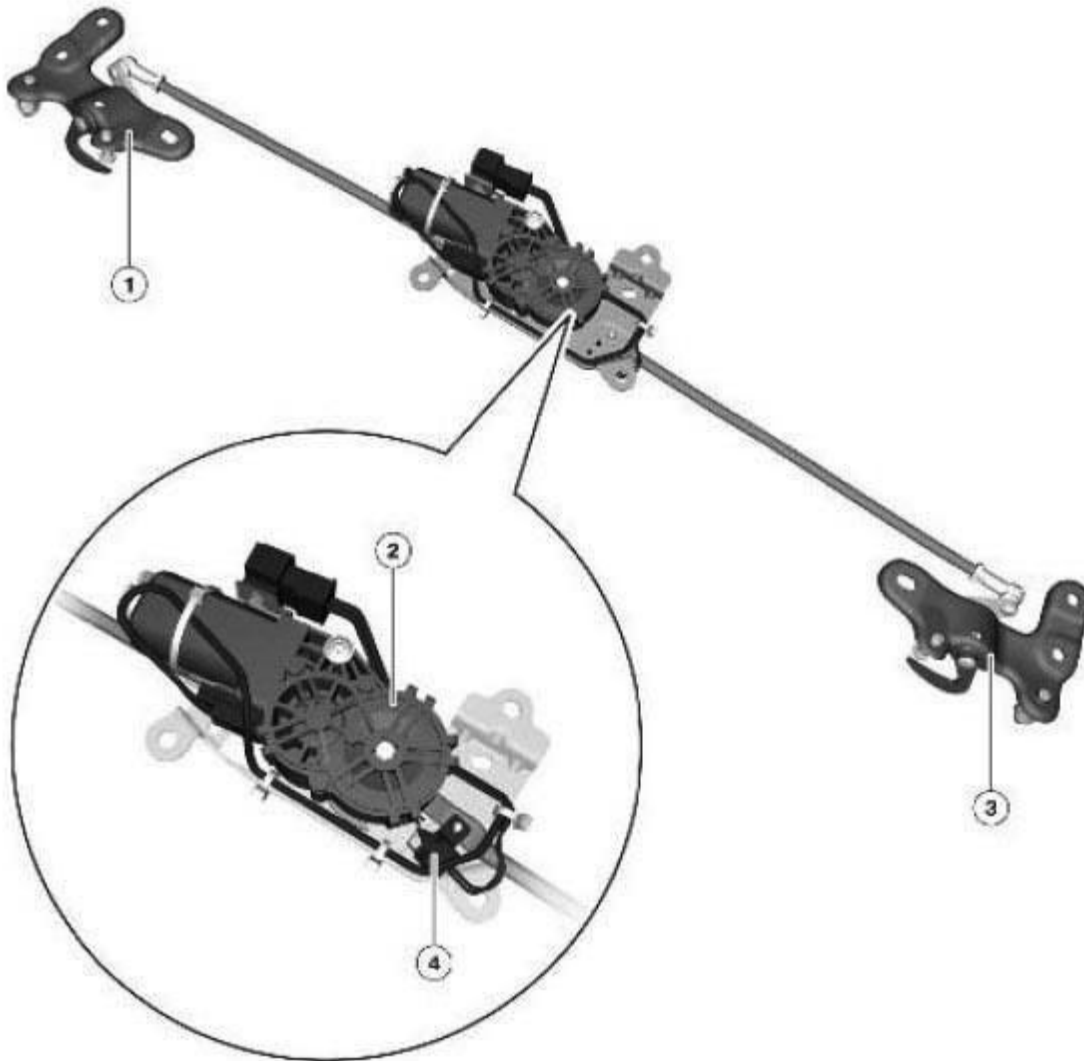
Identifying Drive For Locking Retractable Hardtop
